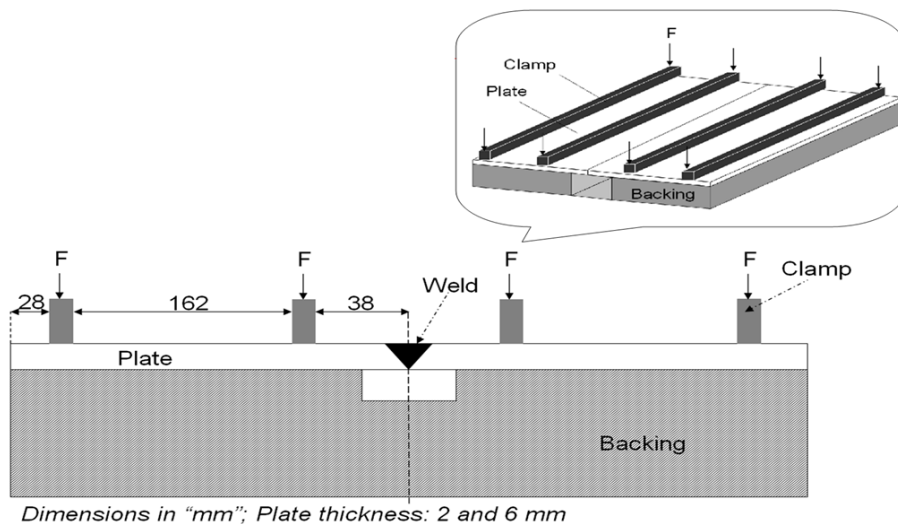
Schematic drawing of the positions of the clamps for large plates.
